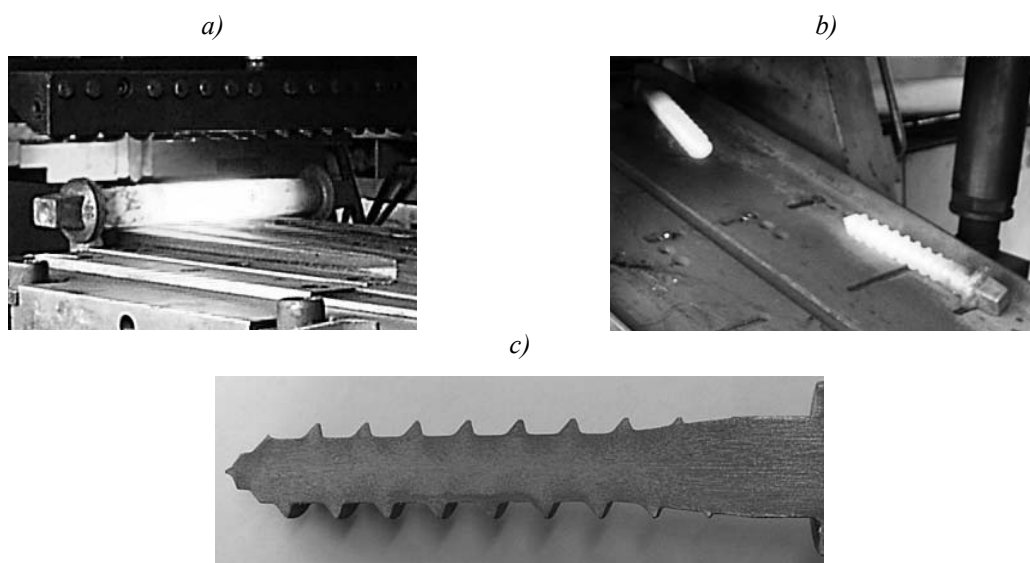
The industrial tests of thread rolling in double configuration with splitting: a) forging with heated middle part put in rolling tools, b) forging falling into the container after rolling, c) section of thread part of the made screw spike
